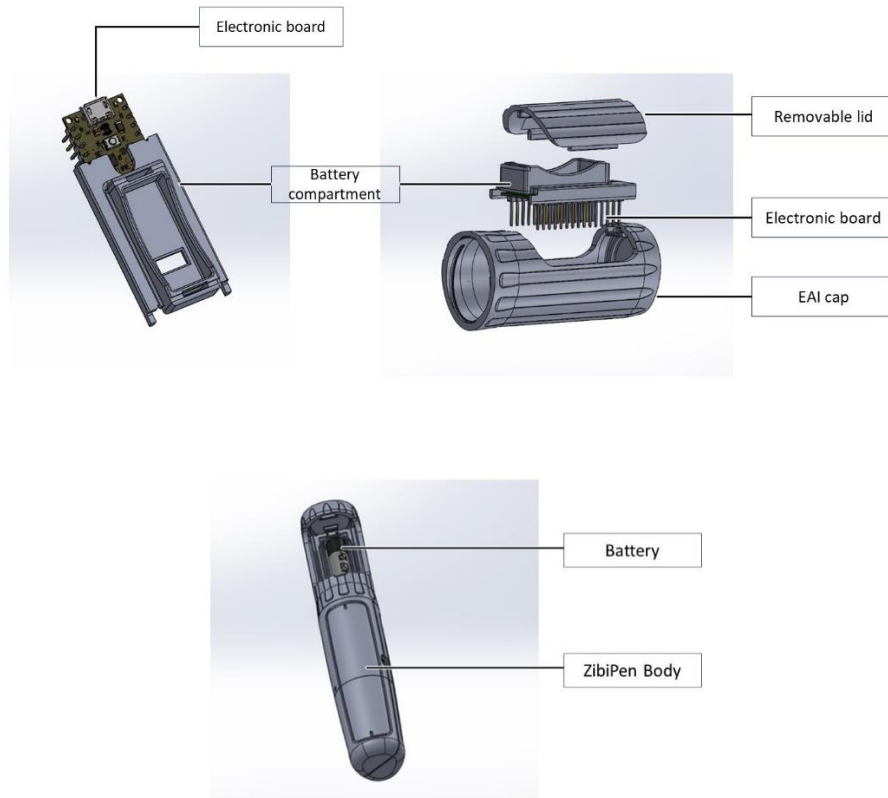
Smart tracker subcomponents and enclosure. CAD assembly
